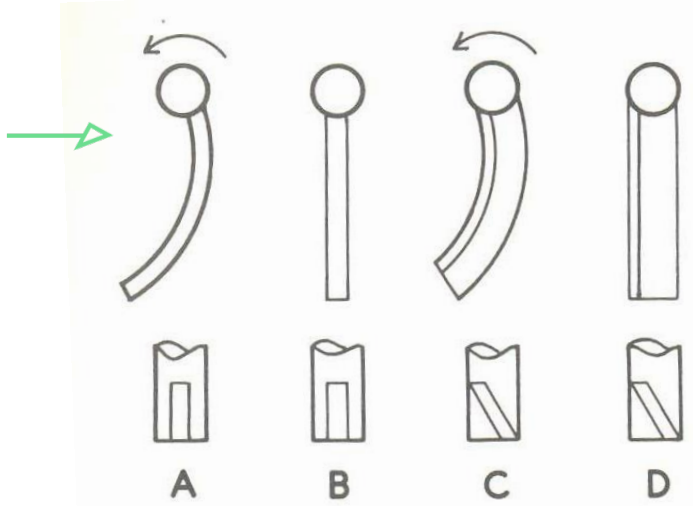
Impeller blade types (only one blade shown), top and side views. A and B, Radial flow design: C and D, mixed radial-axial flow design. For axial pumping, the blade must be set at an incline to the axis of the shaft.
